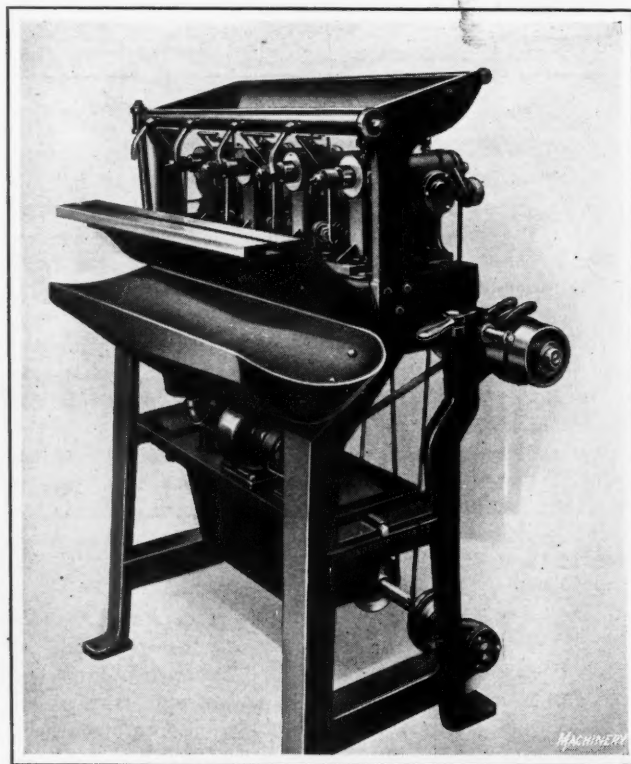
Multiple-spindle Horizontal Gang-type Machine
